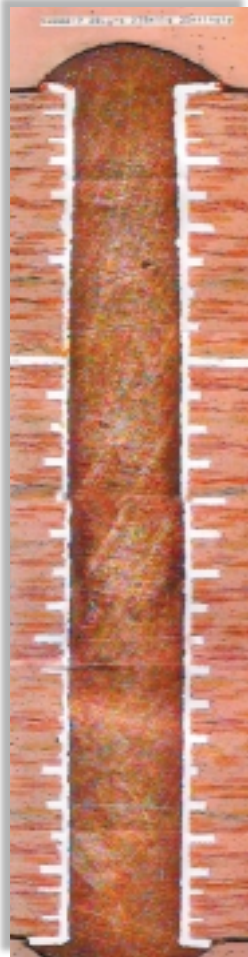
28-layer router backpanel. 275-mils (7 mm) board thickness and 35-mil (0.89mm) diameter hole. Appearance after 2X 10 seconds solder dip @ 288°C. (also passes 6X 10 seconds solder float @ 288°C). Samples courtesy of Wu's Printed Circuit (Kunshan), China.
